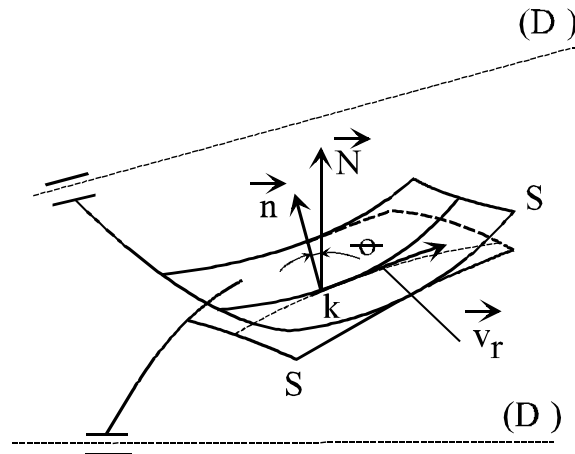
Elements of conjugated surfaces in crossed axes gearing
